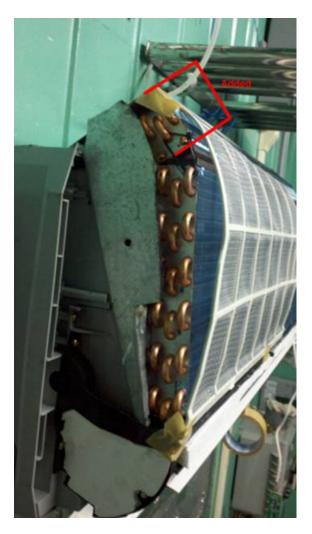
Mini Split AC Prototype Evaporator Coil Enlarged
